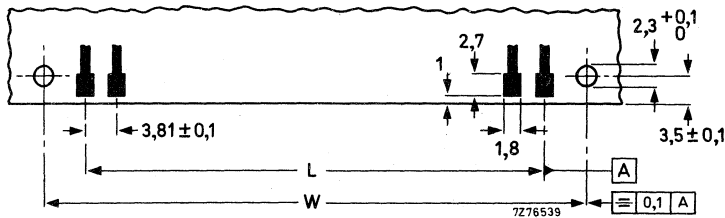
Recommended dimensions of the printed-wiring board to be fitted to the female part; see Table 5 for dimensions L and W.
